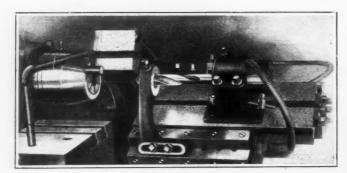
Standard Type of Drill-holder and Drill-support in Operation
